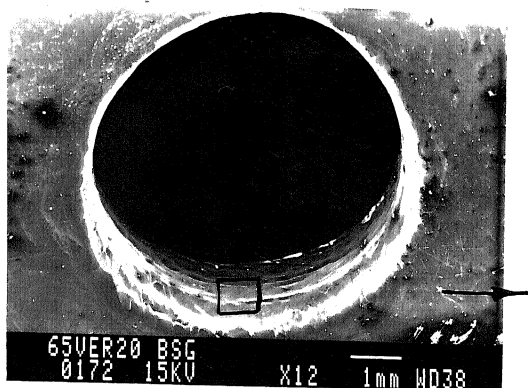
(15) and 3.11(17) show the magnified view of striated sub surfaces of the machined hole in borosilicate glass. This surface may be a resultant of the stepped rotation of the tool and non uniform availability of the electrolyte in machining zone. Figure 3.11(20) shows that such surface is absent when stationary tool is used. However, this sub surface generation can not be completely explained. As is evident from the figure 3.11(18,19) that such surface irregularities on the quartz are observed with different pattern. This sub surface generation phenomenon requires further investigation.
